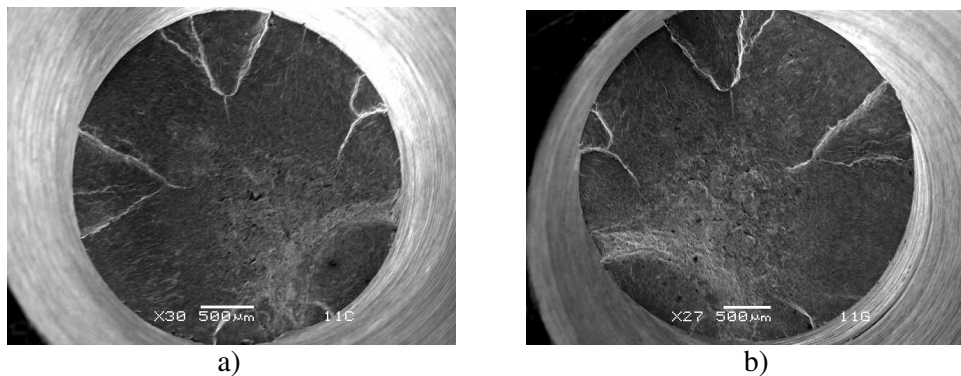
Fracture surfaces: a) right and b) left on specimen No.9
